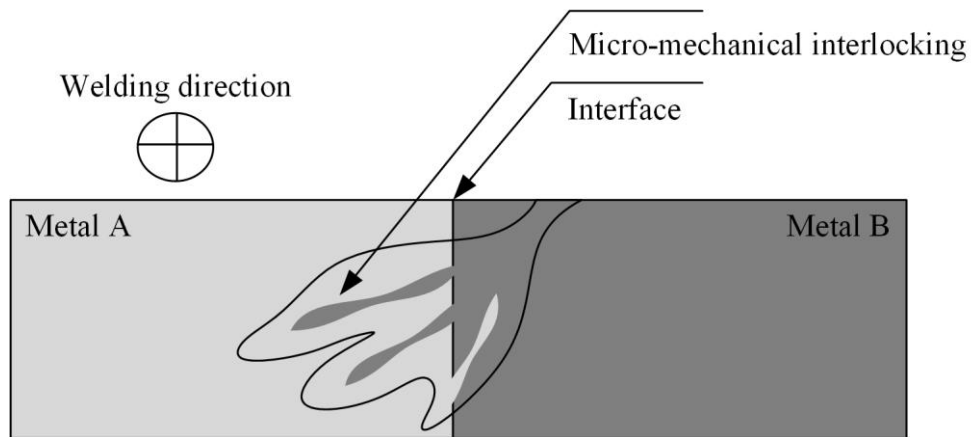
Micro-mechanical interlocking in friction stir welding.
